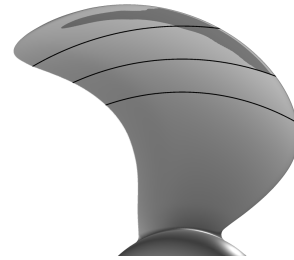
Radial leading edge roughness pattern RE80100 tested on the front side of the propeller.
